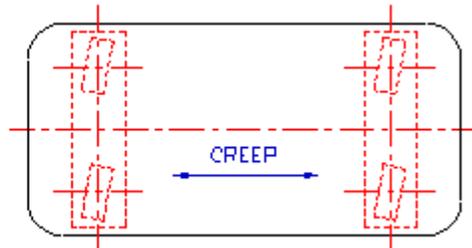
D - COCKED WHEELS IN CHASSIS = ENDCREEP
